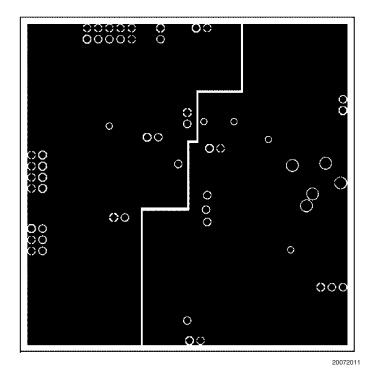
LM4930ITL Demo Board Inner Layer 2
